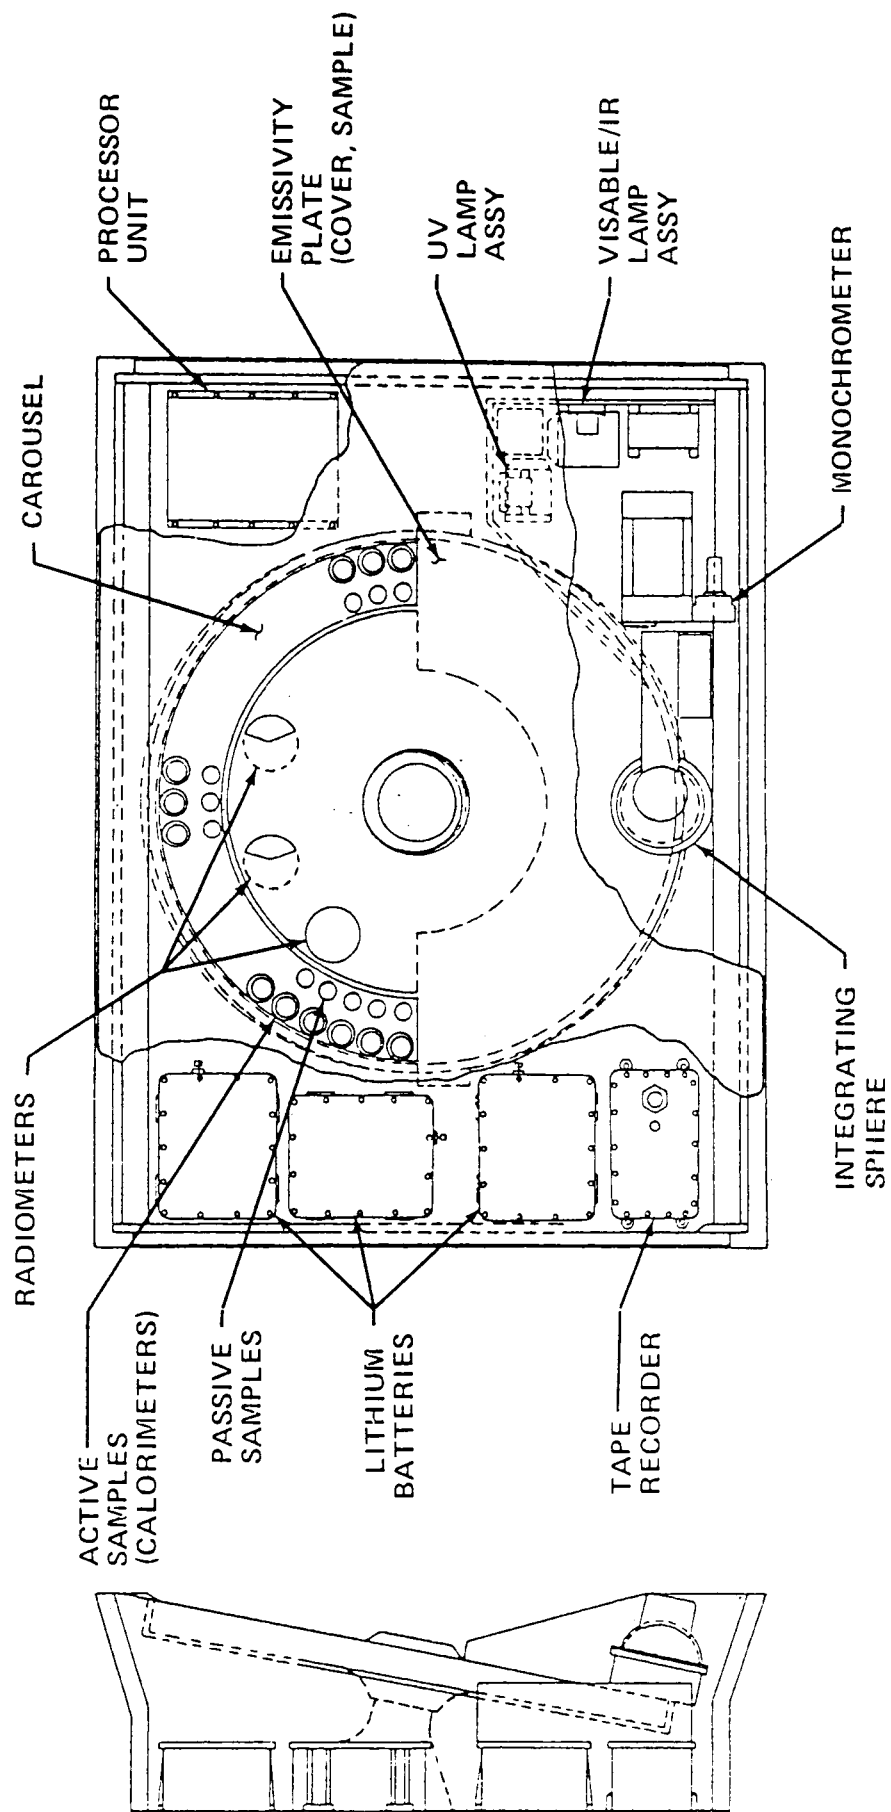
Thermal Control Surfaces Experiment Assembly
